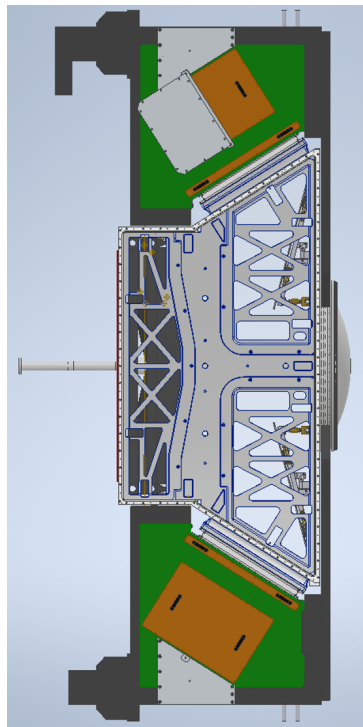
CAD layout of the RICH1 gas enclosure.
